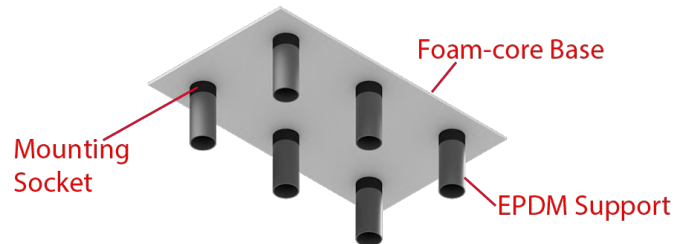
Rendered CAD model of the base frame, showing a foam-core sheet with 6 mounting positions for the legs, EPDM support, and rigid polyurethane foam mounting sockets.
